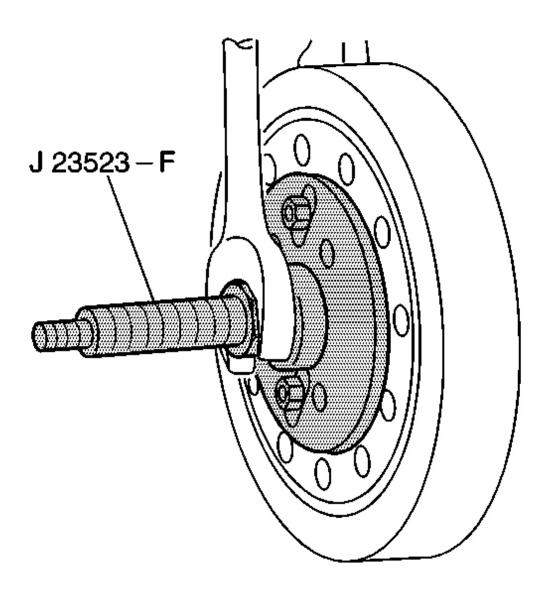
Pressing Crankshaft Balancer Onto Crankshaft Using J 23523-F Courtesy of GENERAL MOTORS CORP.
